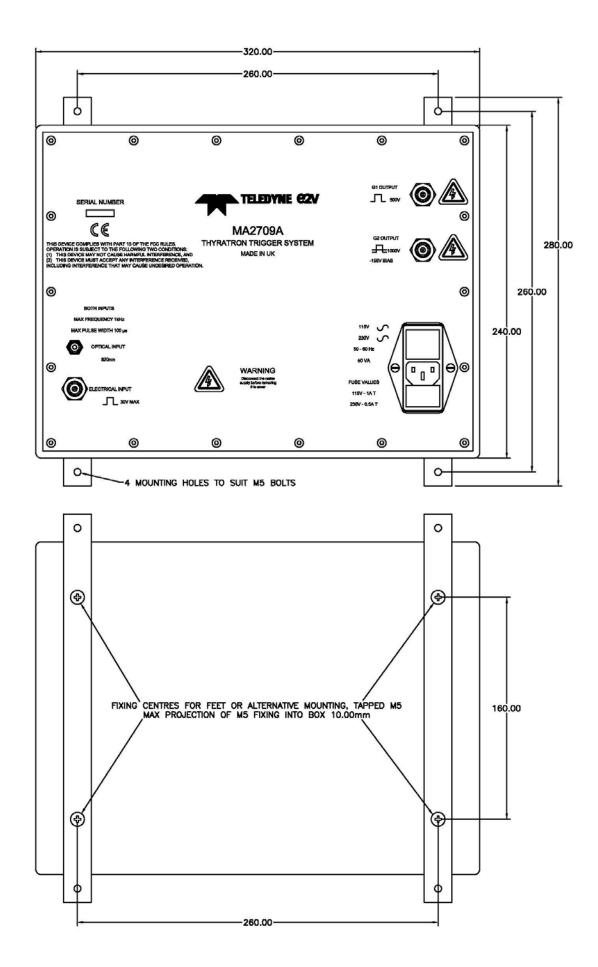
Box Layout and mounting (All dimensions nominal and in mm)
